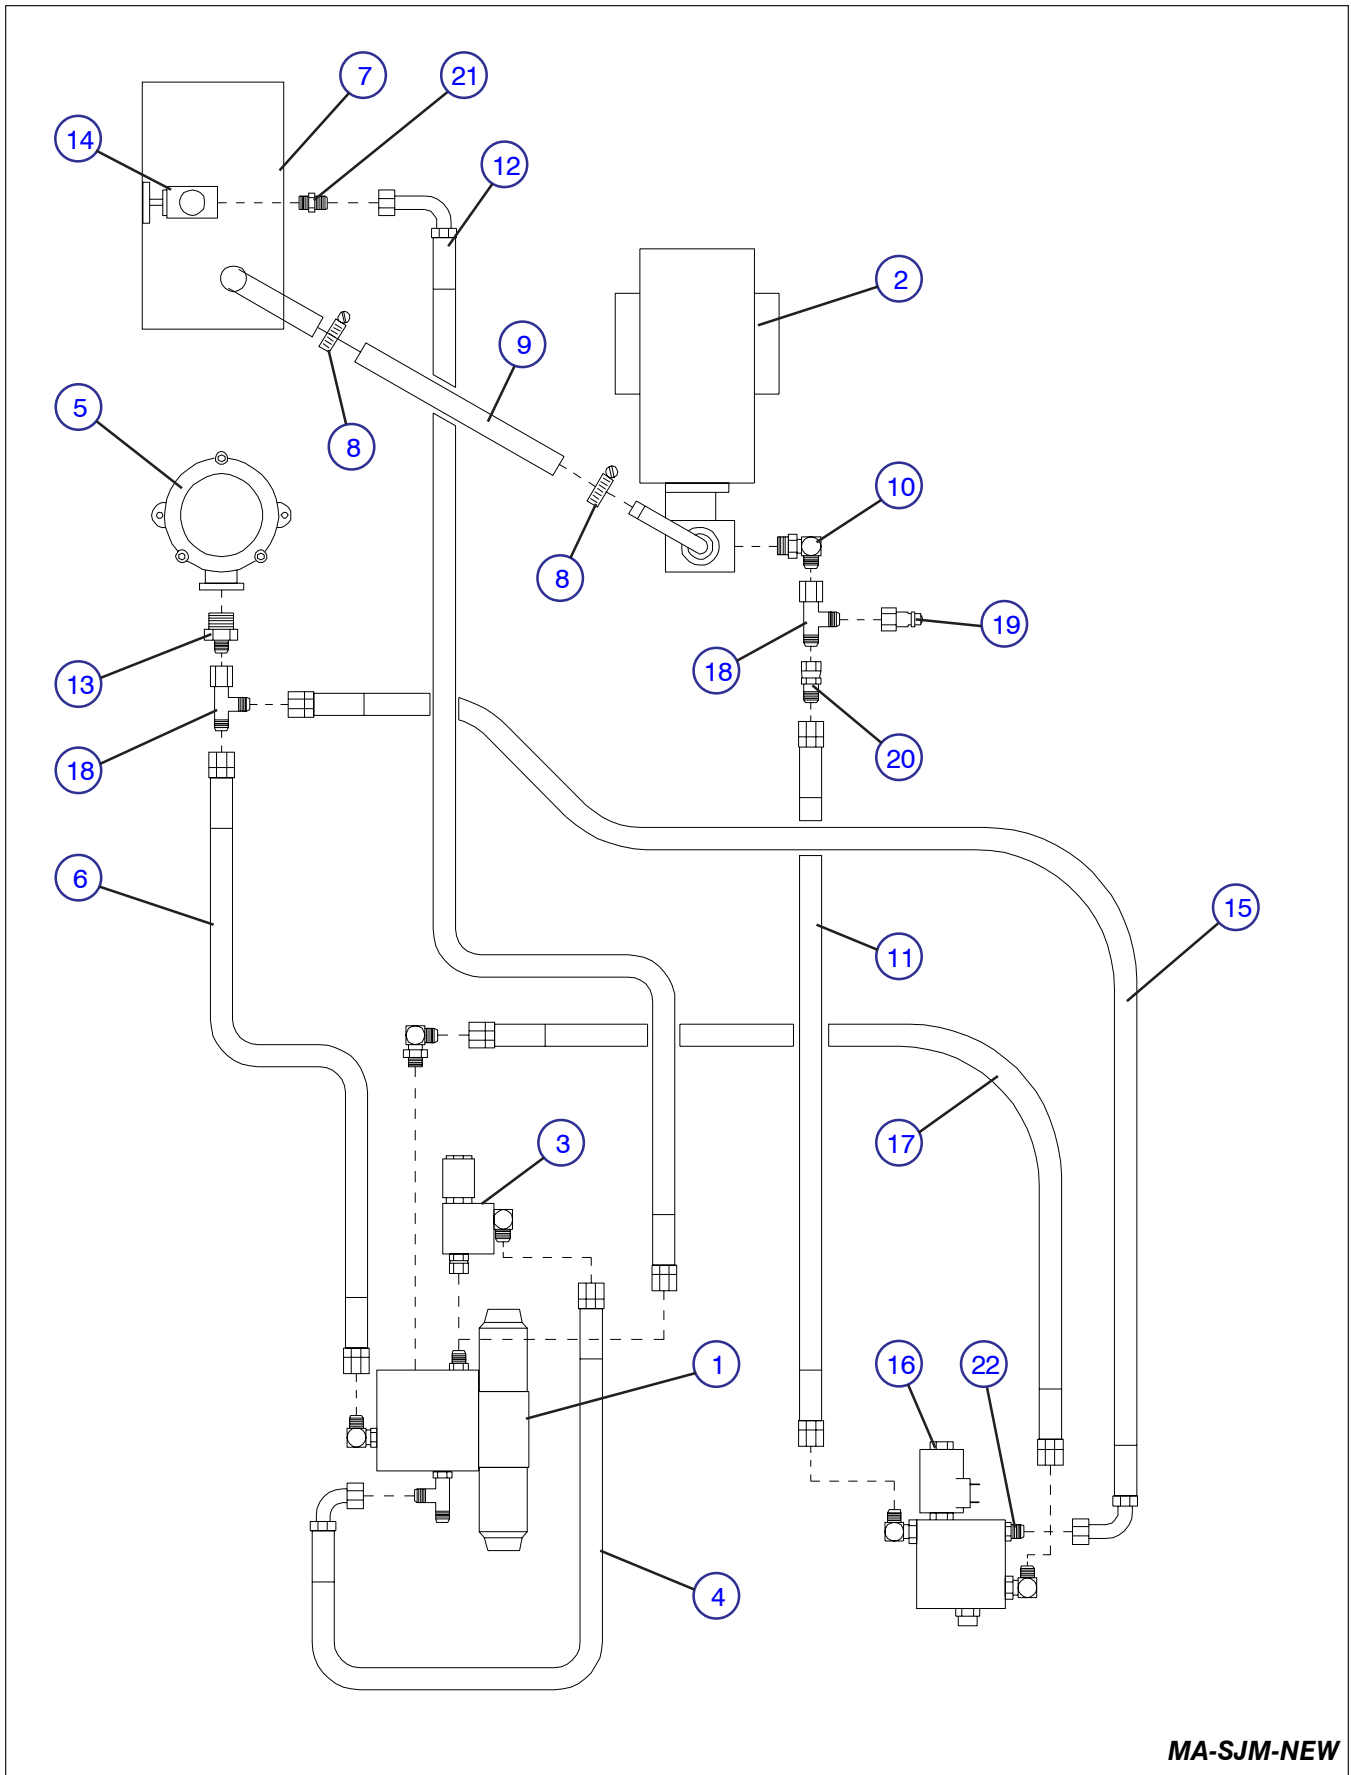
B. PUMP AND MOTOR ASSEMBLY
